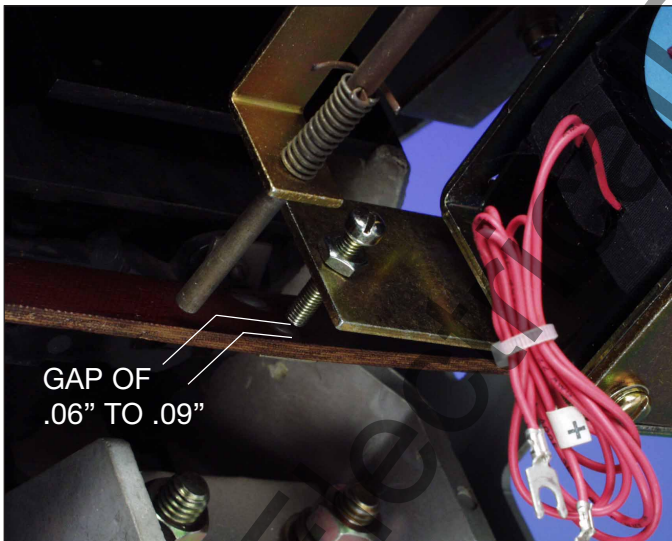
Setting the Trip Screw to Breaker Trip Bar Gap
